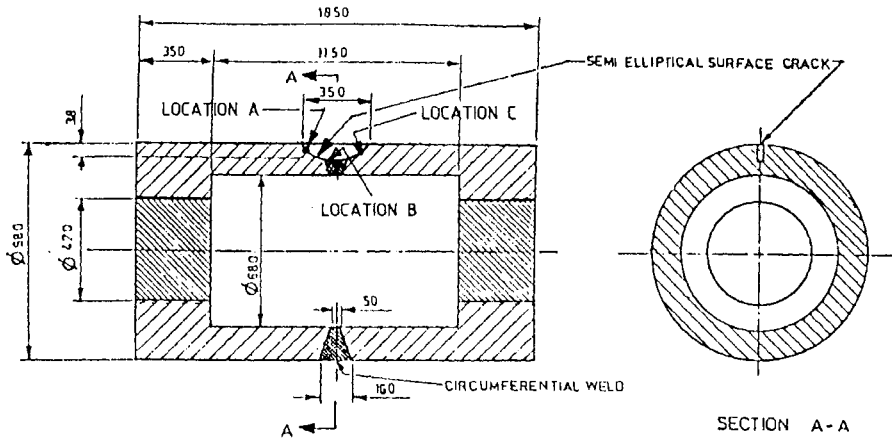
Geometry of welded cylinder with axial surface crack.
